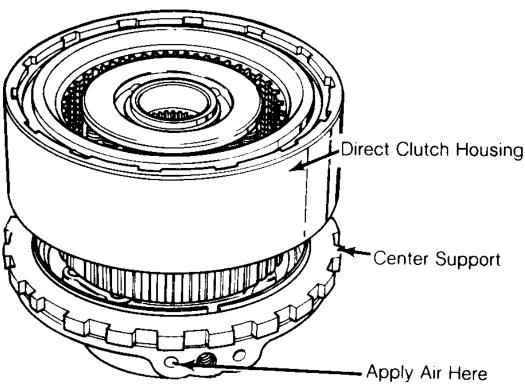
Direct Clutch & Intermediate Roller Clutch Assembly Courtesy of GENERAL MOTORS CORP.
